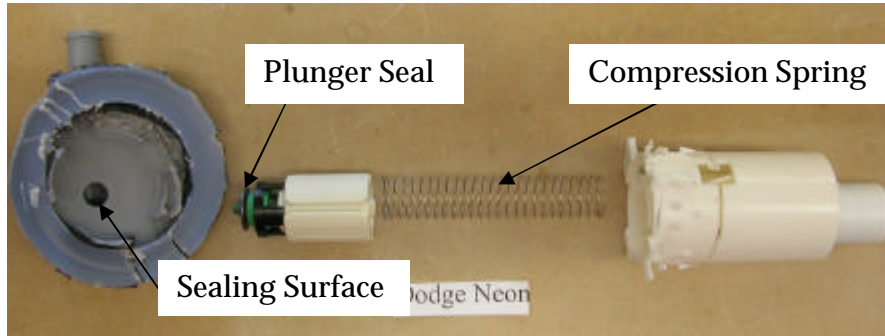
Dodge Neon fuel vapour valve - disassembled.
